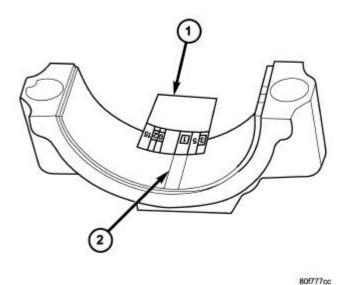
Measuring Bearing Clearance With Plastigage Courtesy of CHRYSLER GROUP, LLC
